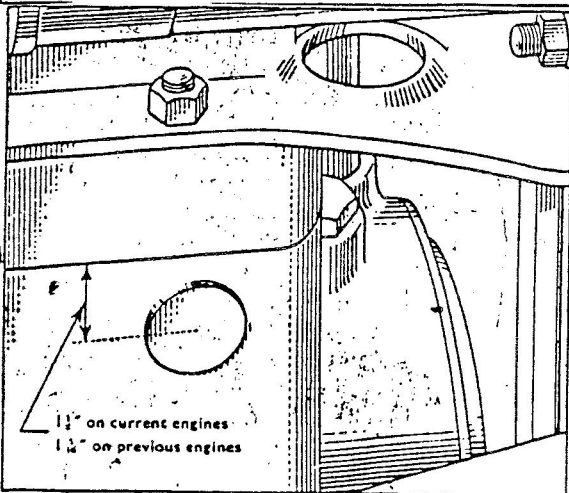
Further modification of a modified cylinder block can be made from the dimensions shown here.
